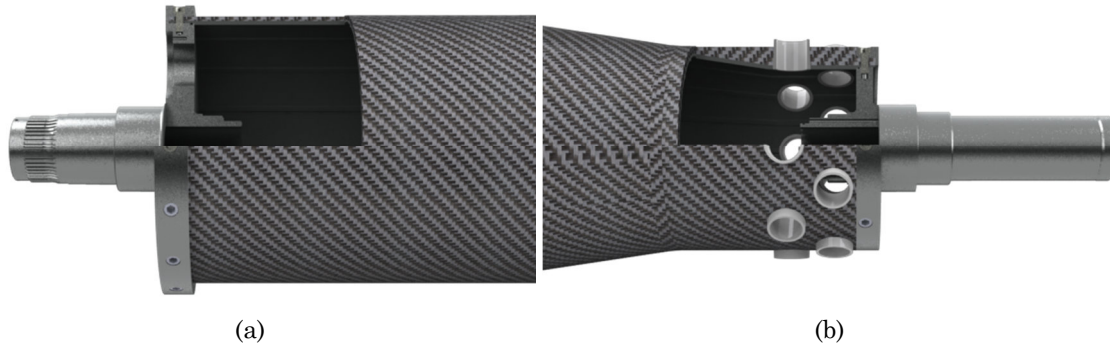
Rendered CAD model of the flange assemblies for the (a) liquid end and (b) solids end
